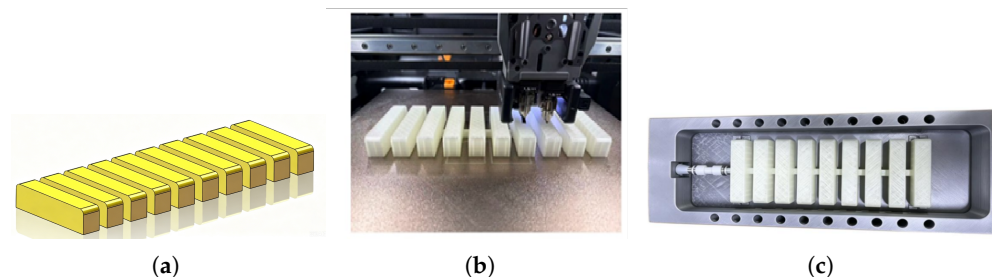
The proposed mold: (a) CAD drawing of inner molds and (b) 3D-printed PVA inner molds, and (c) assembly.
